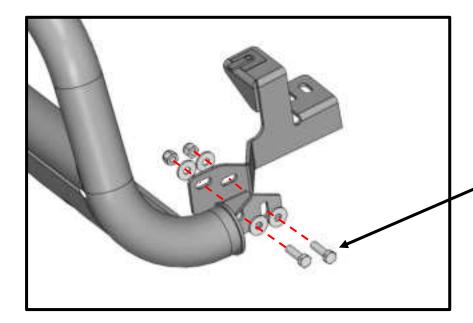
Install the Mounting Bracket to the Bolt Plate as pictured.
